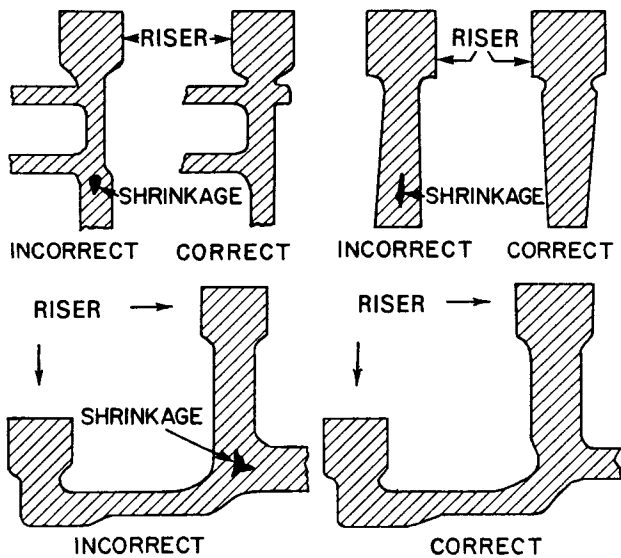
Schematic examples of design sections showing correct arrangements to improve casting soundness (1).
